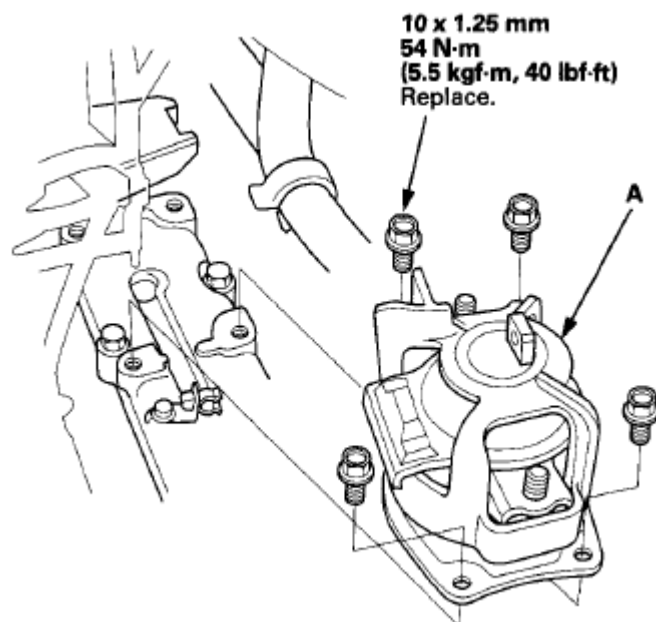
Installing Rear Engine Mount Assembly To Front Subframe With Torque Specifications
